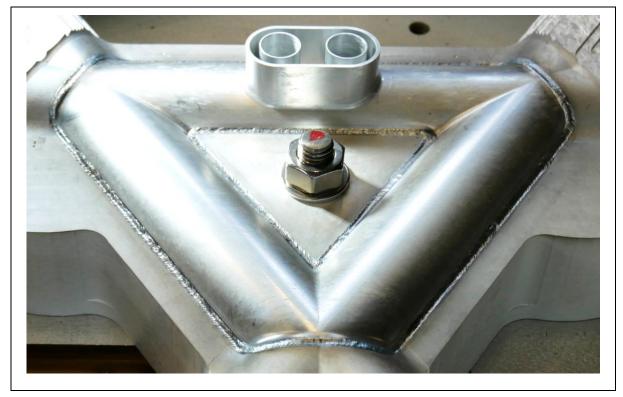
Vacuum vessel assembly after the final welding
